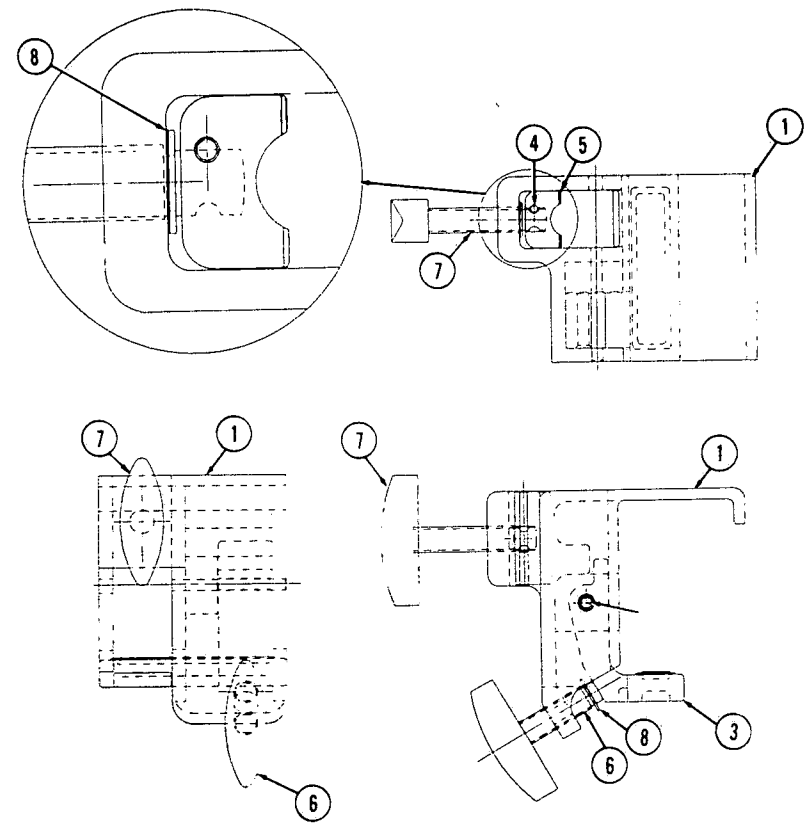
CLAMP ASSEMBLIES (After 5/84).
